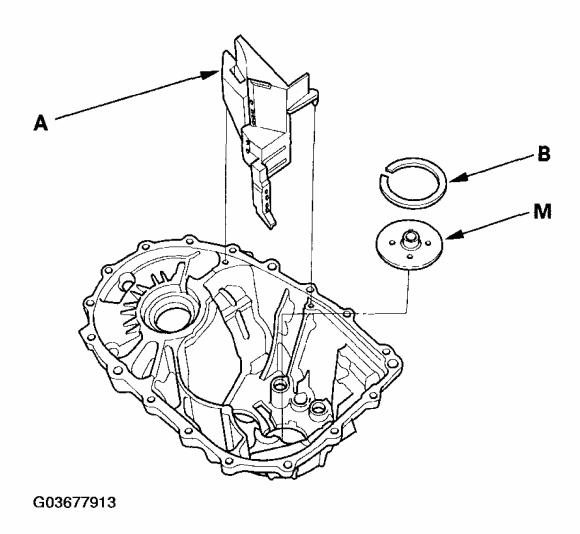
Removing Oil Gutter Plate, Shim, And Oil Guide Plate Courtesy of AMERICAN HONDA MOTOR CO., INC.
